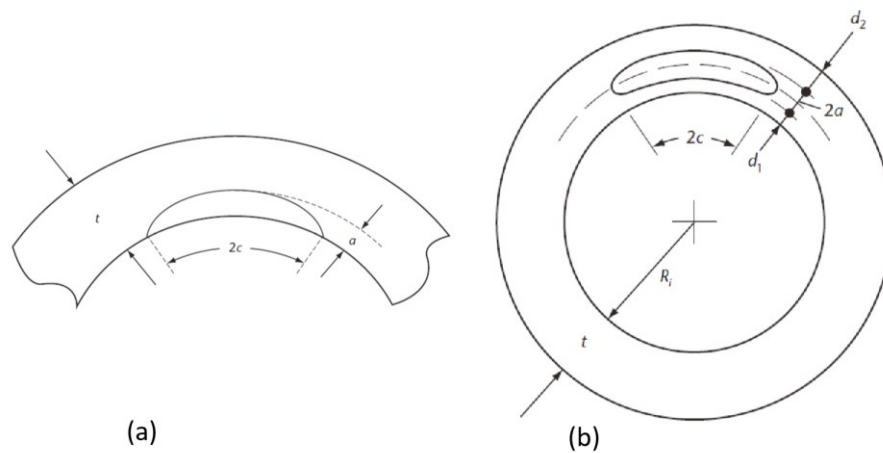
Schematic classification of weld defects according to CSA Z662.11 (a) surface breaking and (b) embedded defects [10]
